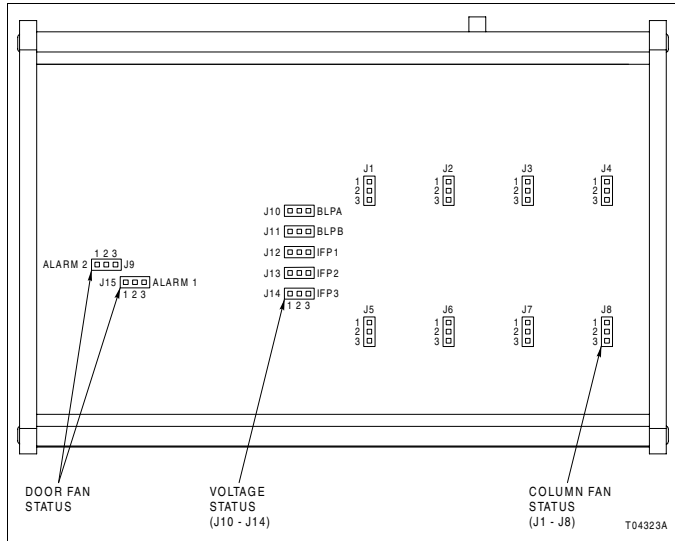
Alarm Assembly Layout (Jumpers)
